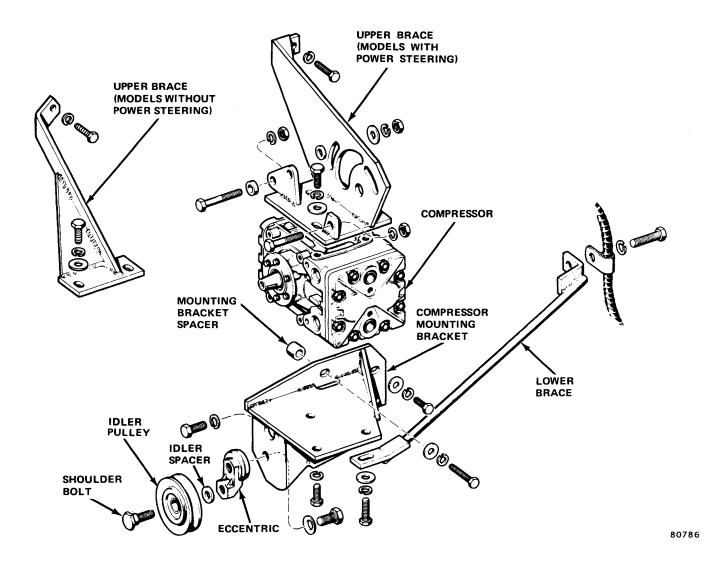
Compressor Mounting—Four-Cylinder Engine
